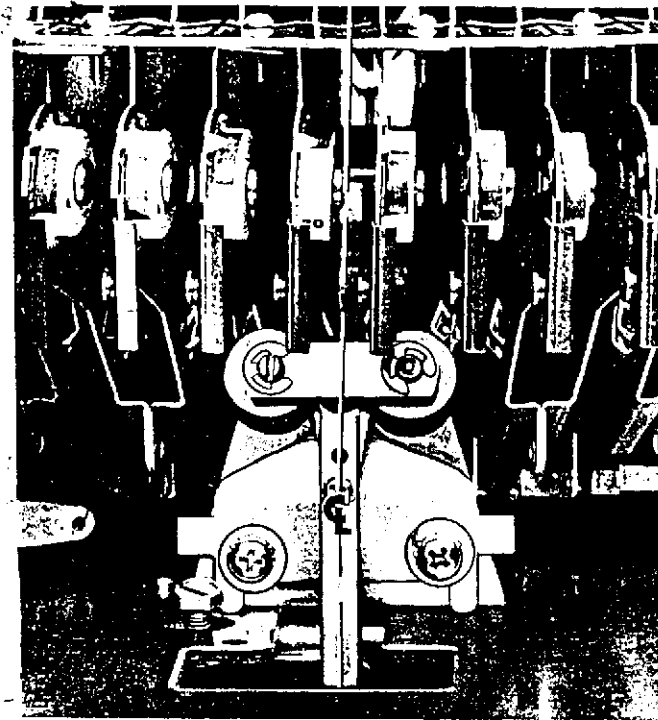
CENTER LINE FOR BACK STOP PAWL SETTING
